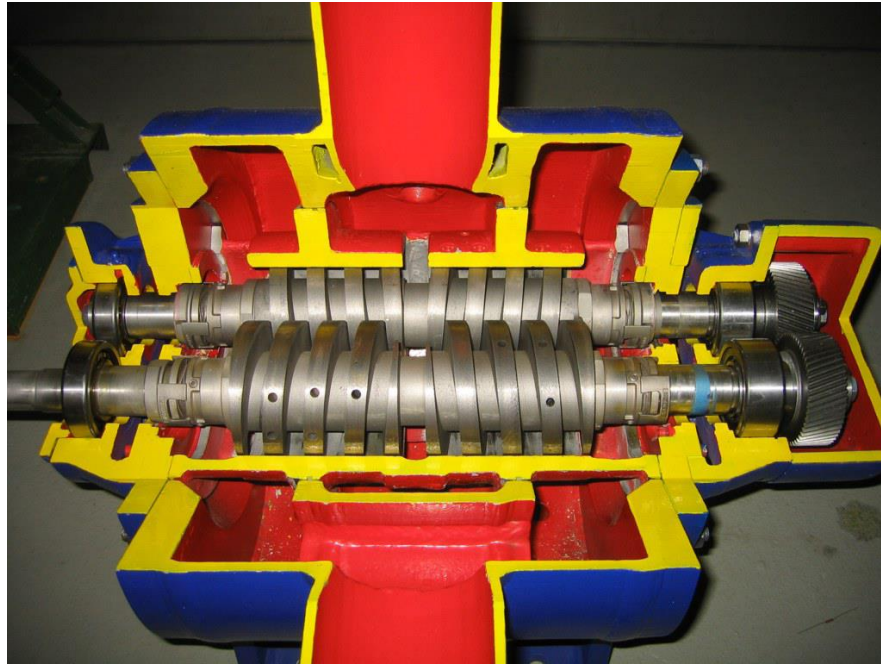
Cutaway of a multiphase twin-screw pump [6]
